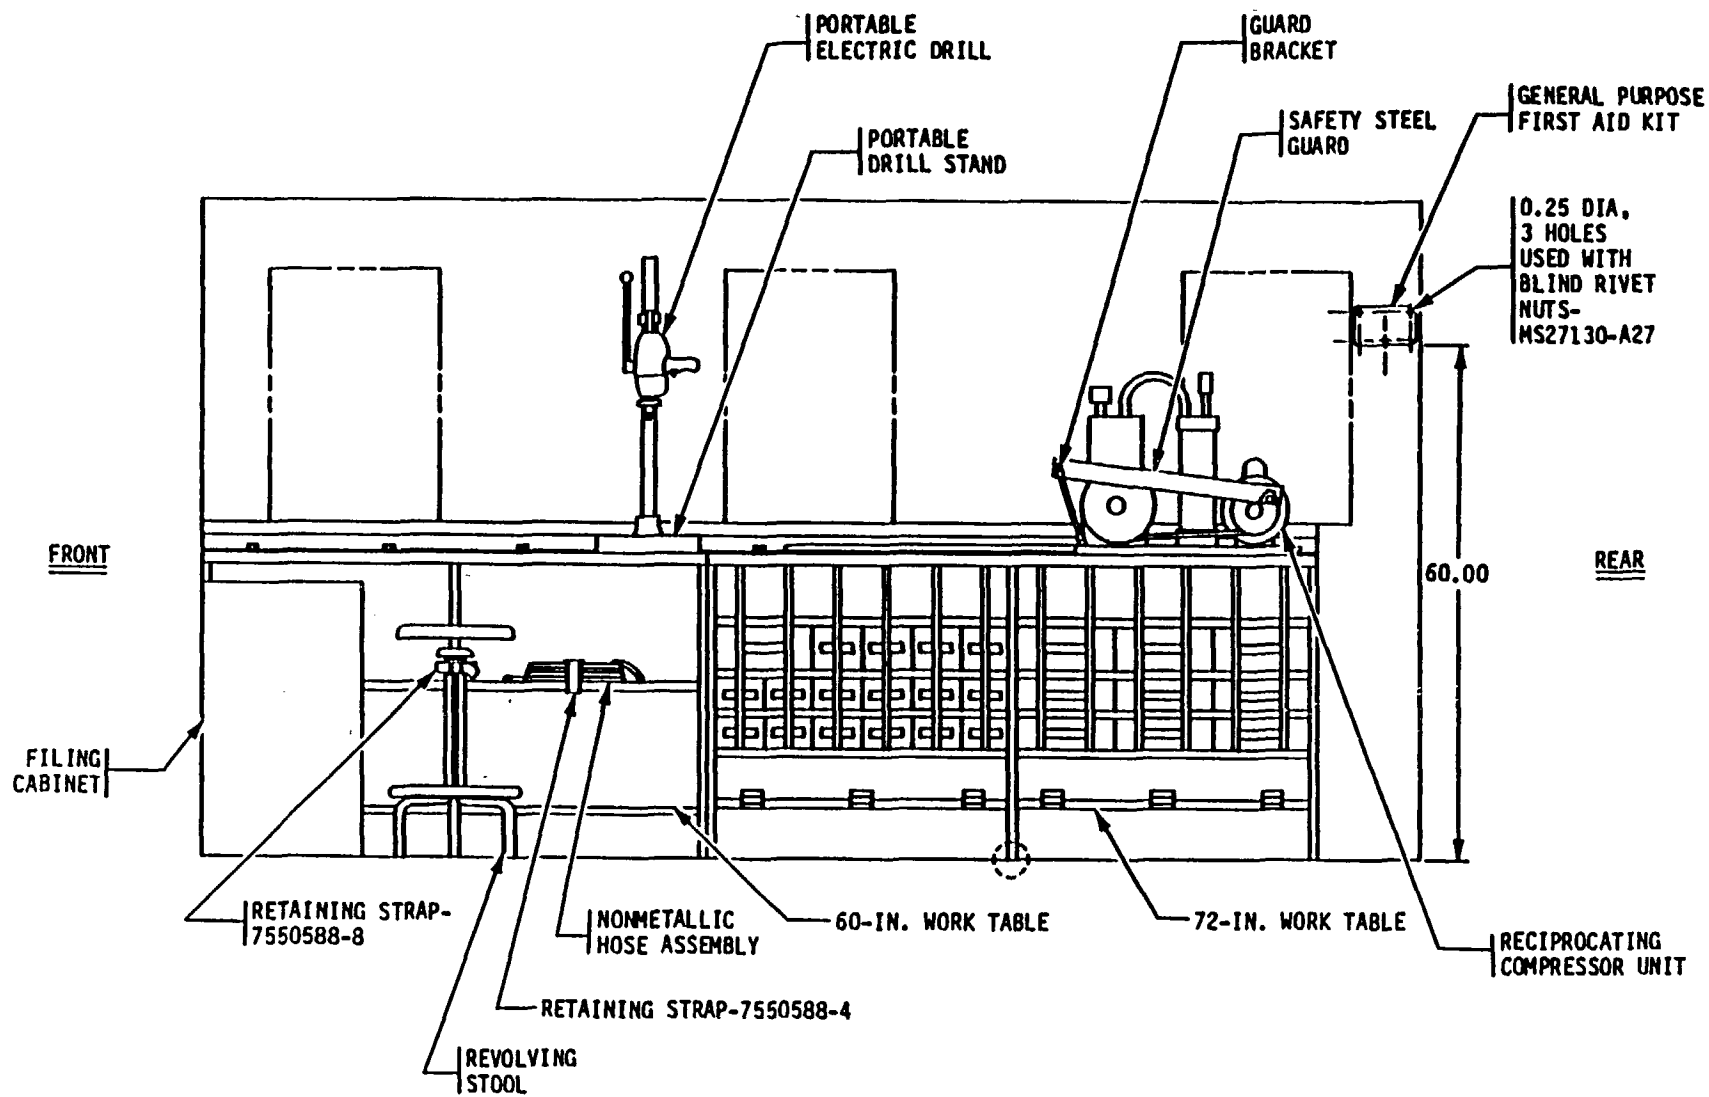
Components to be Mounted, M109A3, Right Side Elevation.
